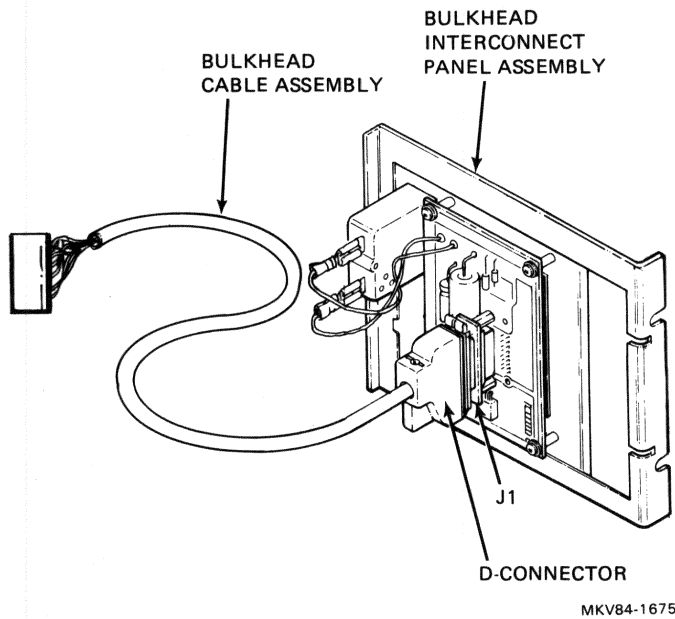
70-18798- Bulkhead Cable Assembly and 70-18799-00 Bulkhead Interconnect Panel Assembly
